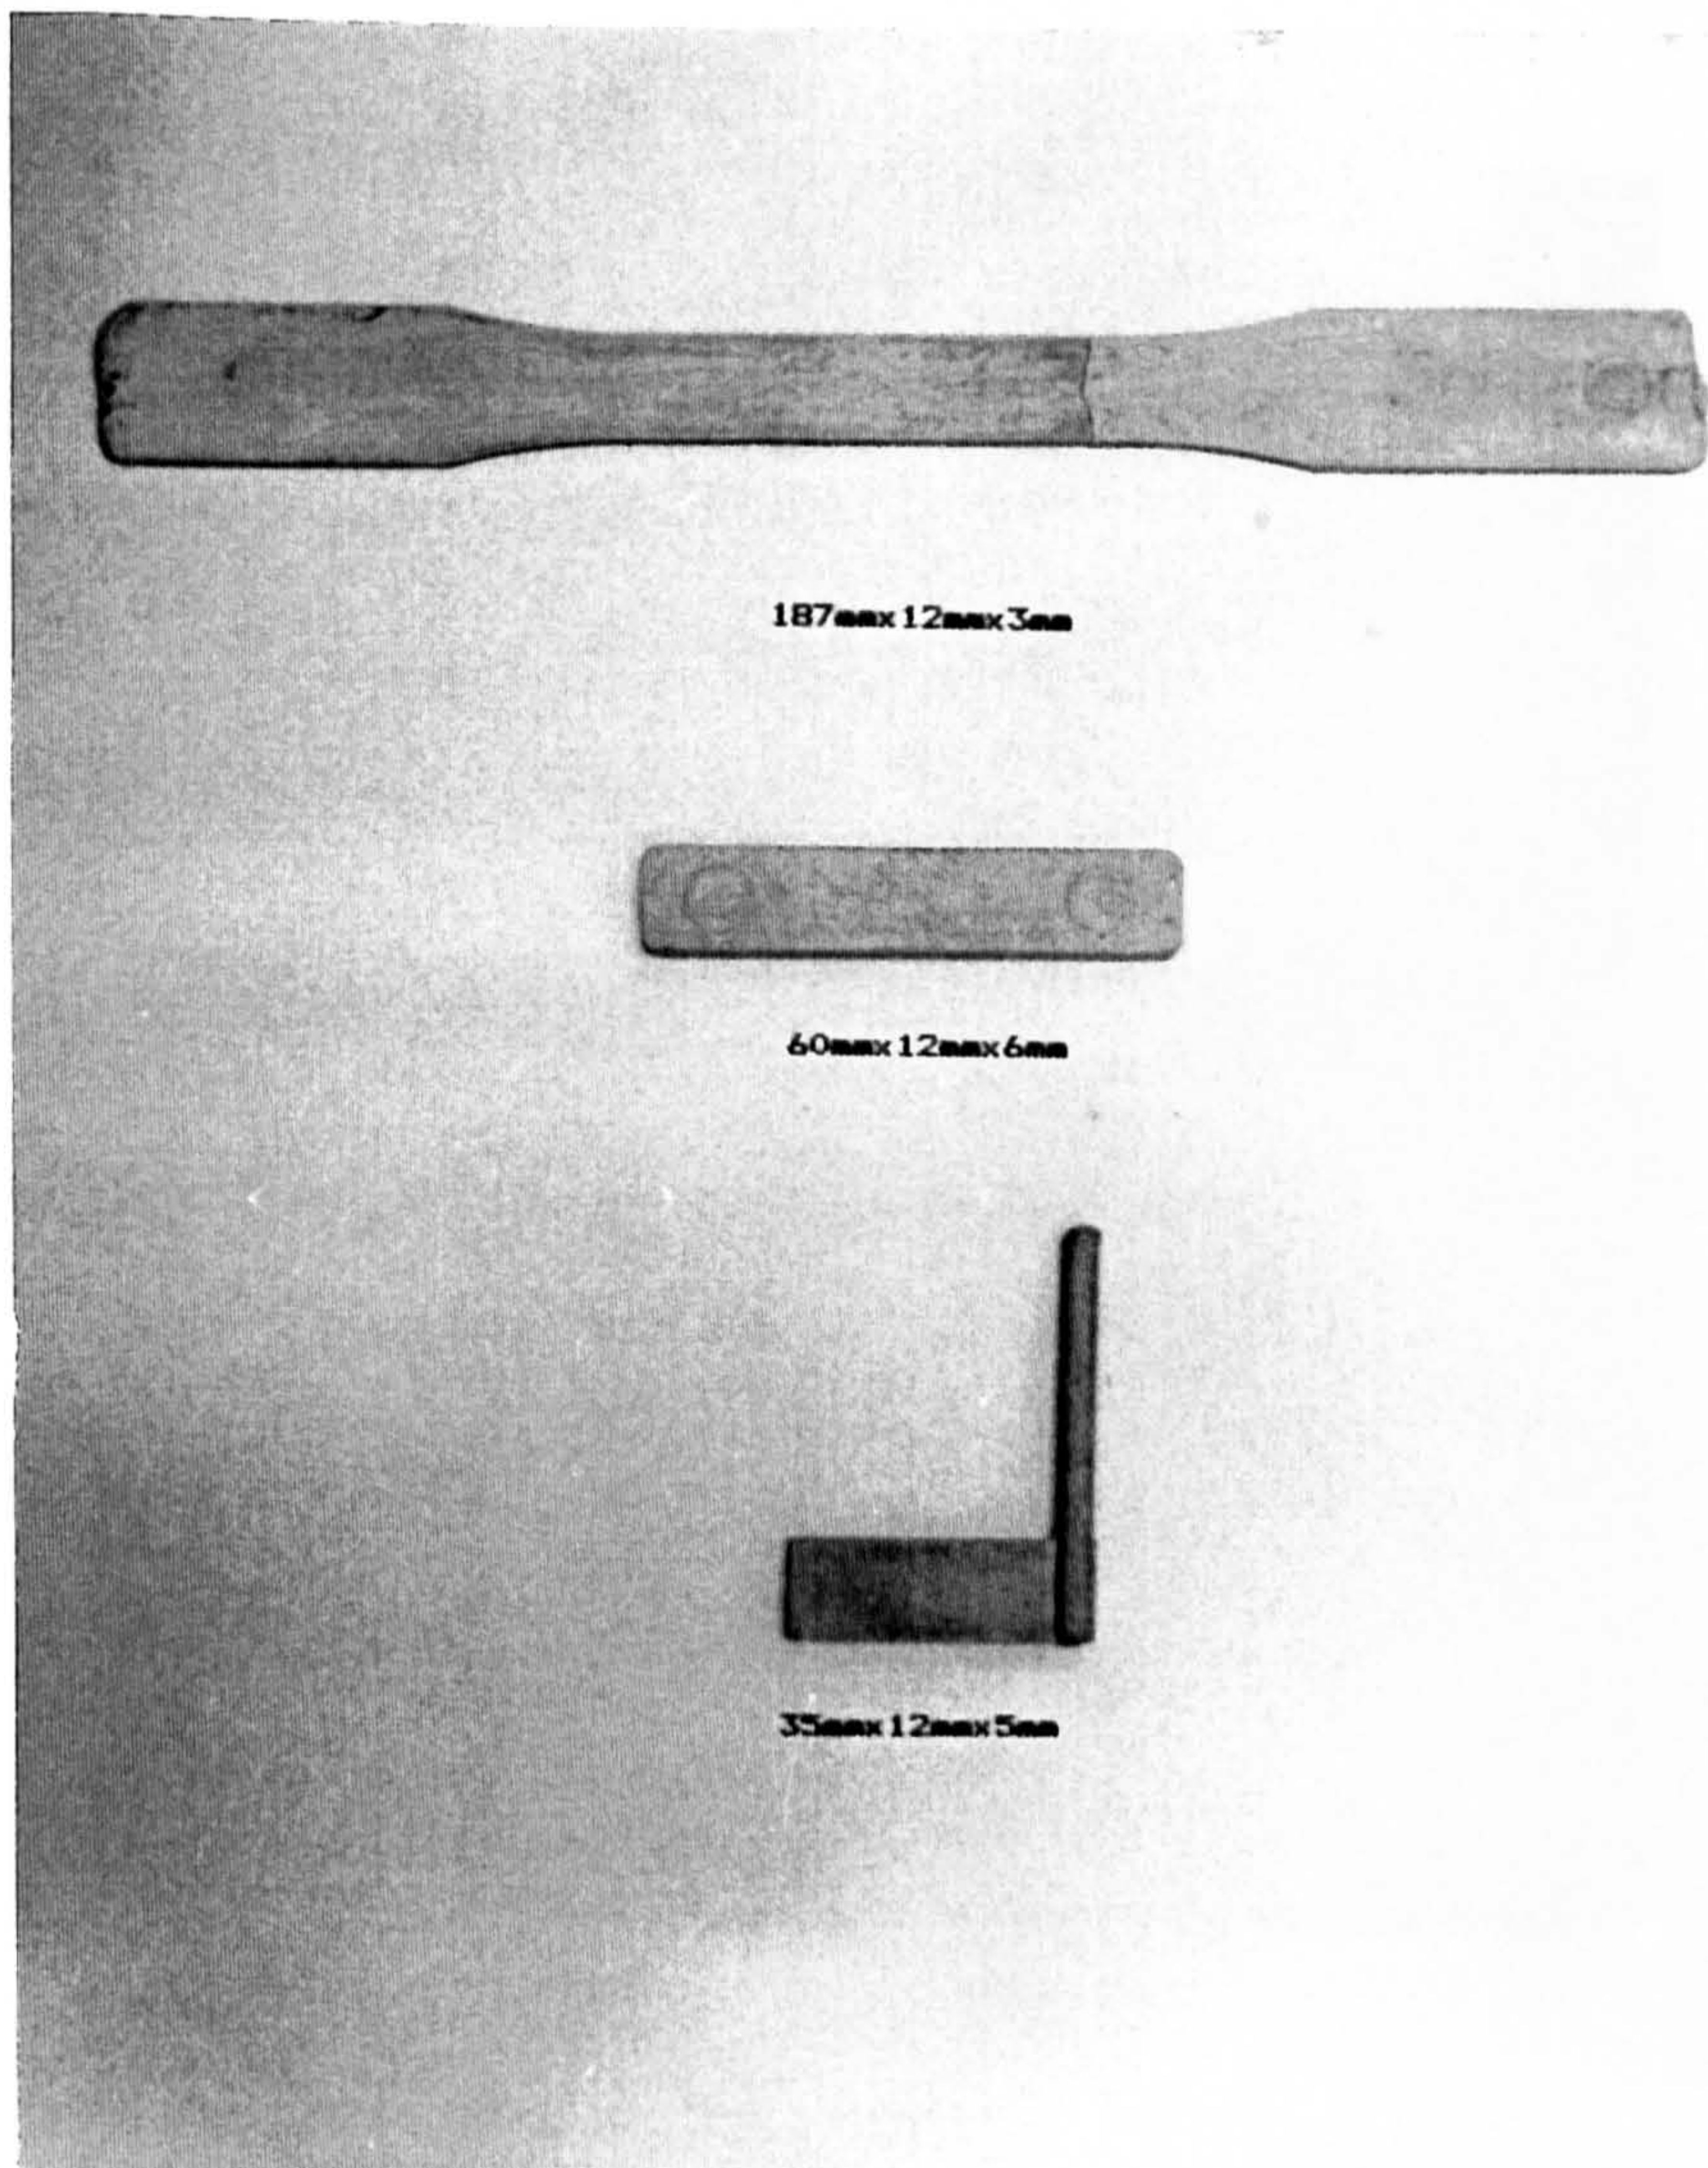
(a) Injection moulded samples of size 187 mm X 12 mm X 3 mm and 62 mm X 12 mm X 6 mm using the Fox and Offord injection moulder;
